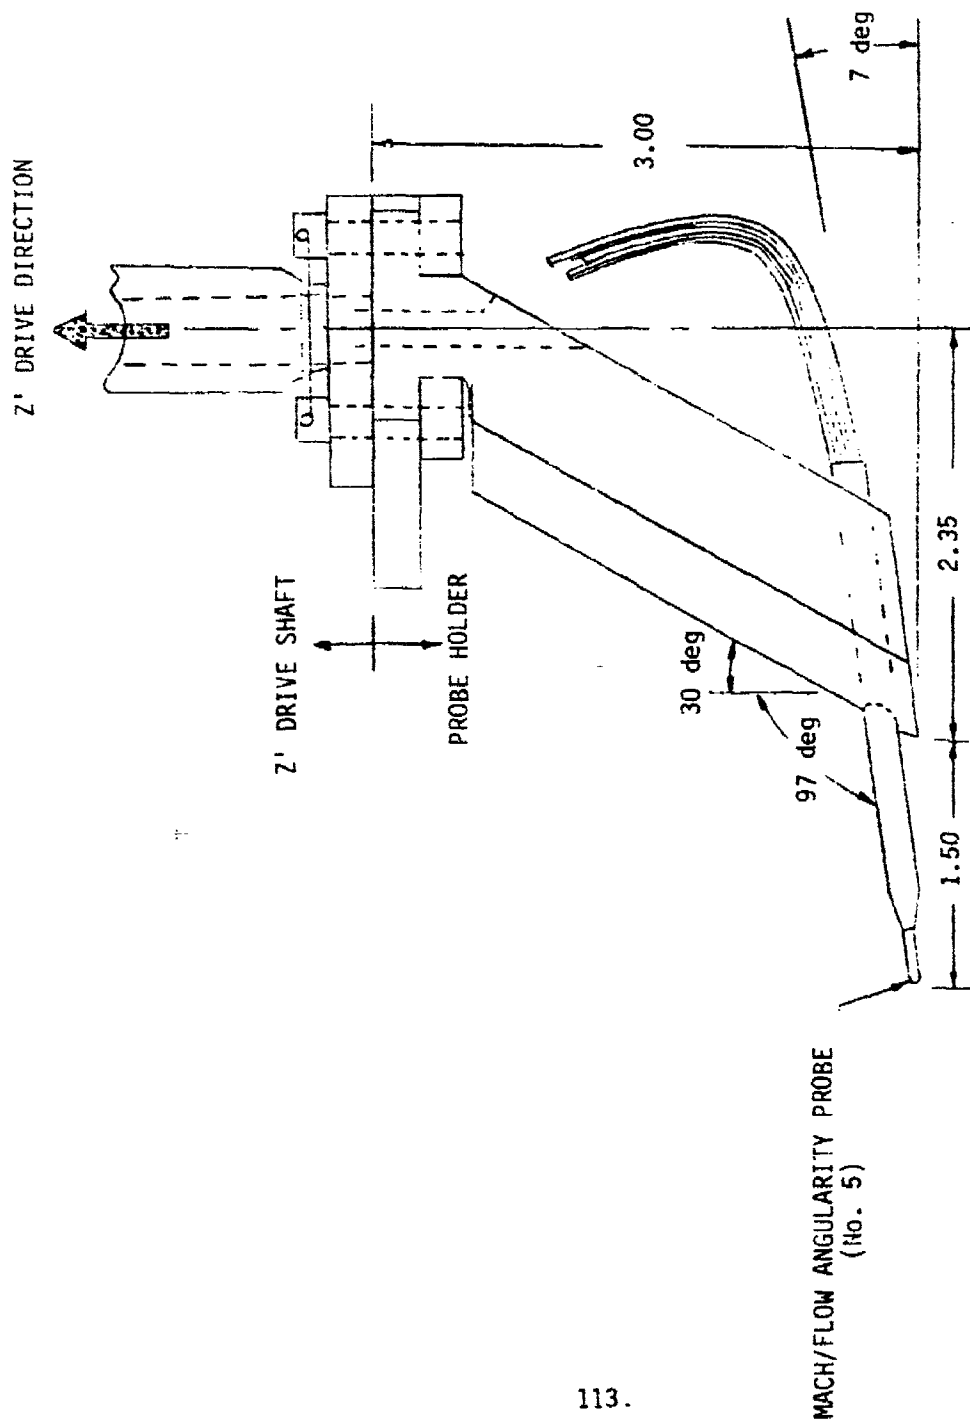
PROBE HOLDER ASSEMBLY-MACH/FLOW-ANGULARITY PROBE
